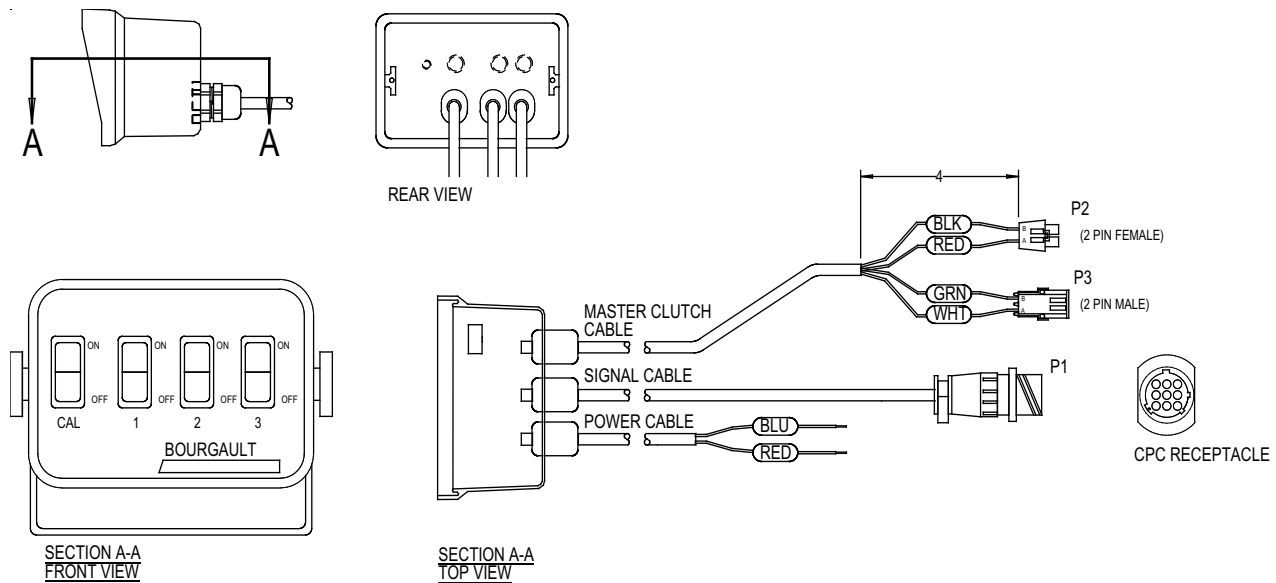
Multi Clutch Remote Switch Box (4 Switches) (On the Air Seeder CHASSIS) - 3120-72-01
